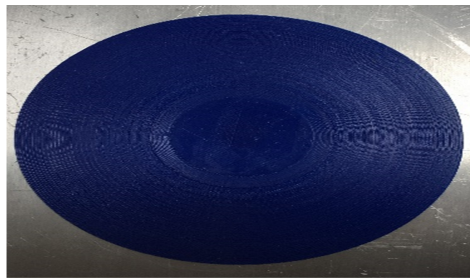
Mounted 3D printed cambered plate-type acoustic valve sample(Top View).
